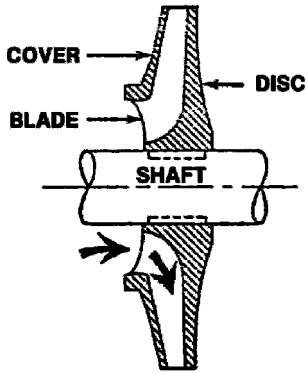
Cross-sectional view of an impeller. (*Dresser-Rand Company, Olean, N.Y.*)
